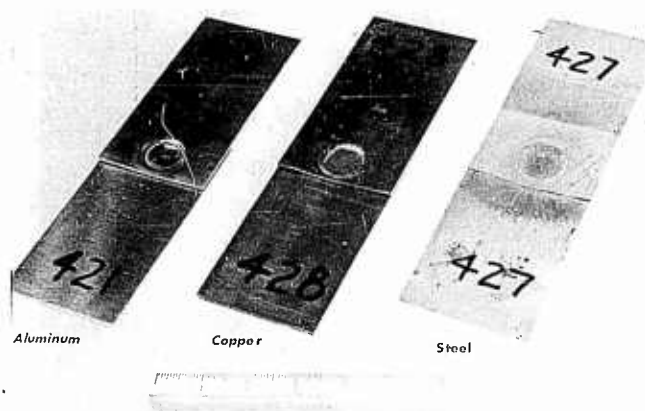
Explosively spot welded, lap joints in three base metals
